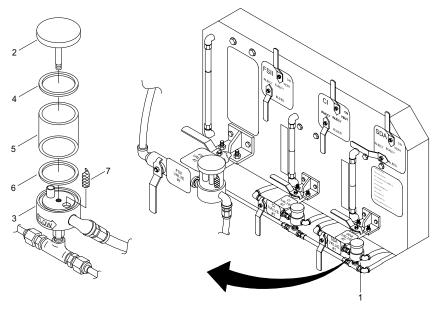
Fuel Additive Injector Assembly Sight Flow Indicator (SDA).
